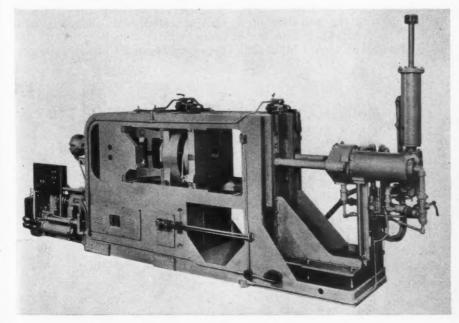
Lester-Phoenix Machine Equipped for Making Asuminum, Brass, and Magnesium Die-castings
